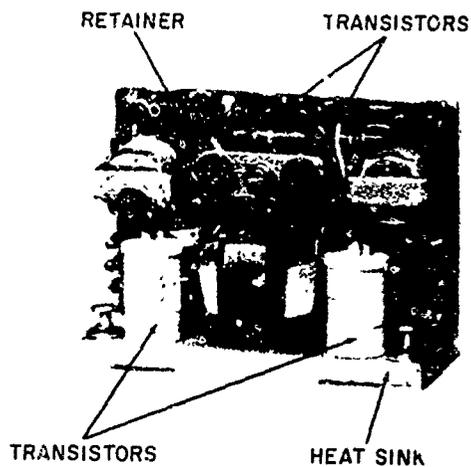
Printed Wiring Board Treated With Conformal Coating
